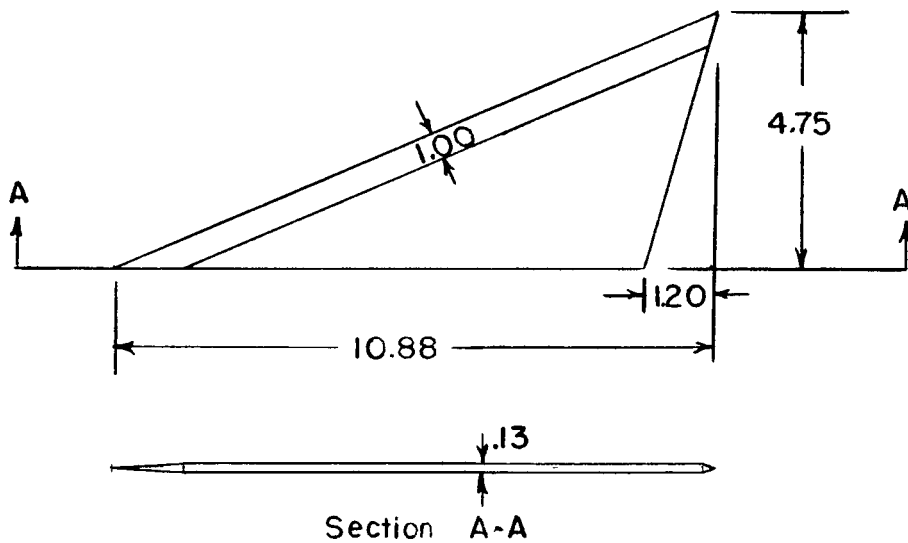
Sketches of model tested with SIDEWINDER rollerons. All dimensions in inches.
